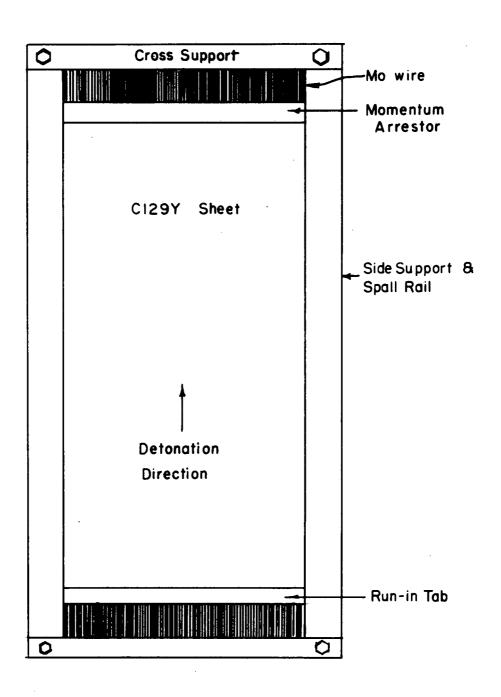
Sketch of Top View of Explosive Welding Arrangement.
